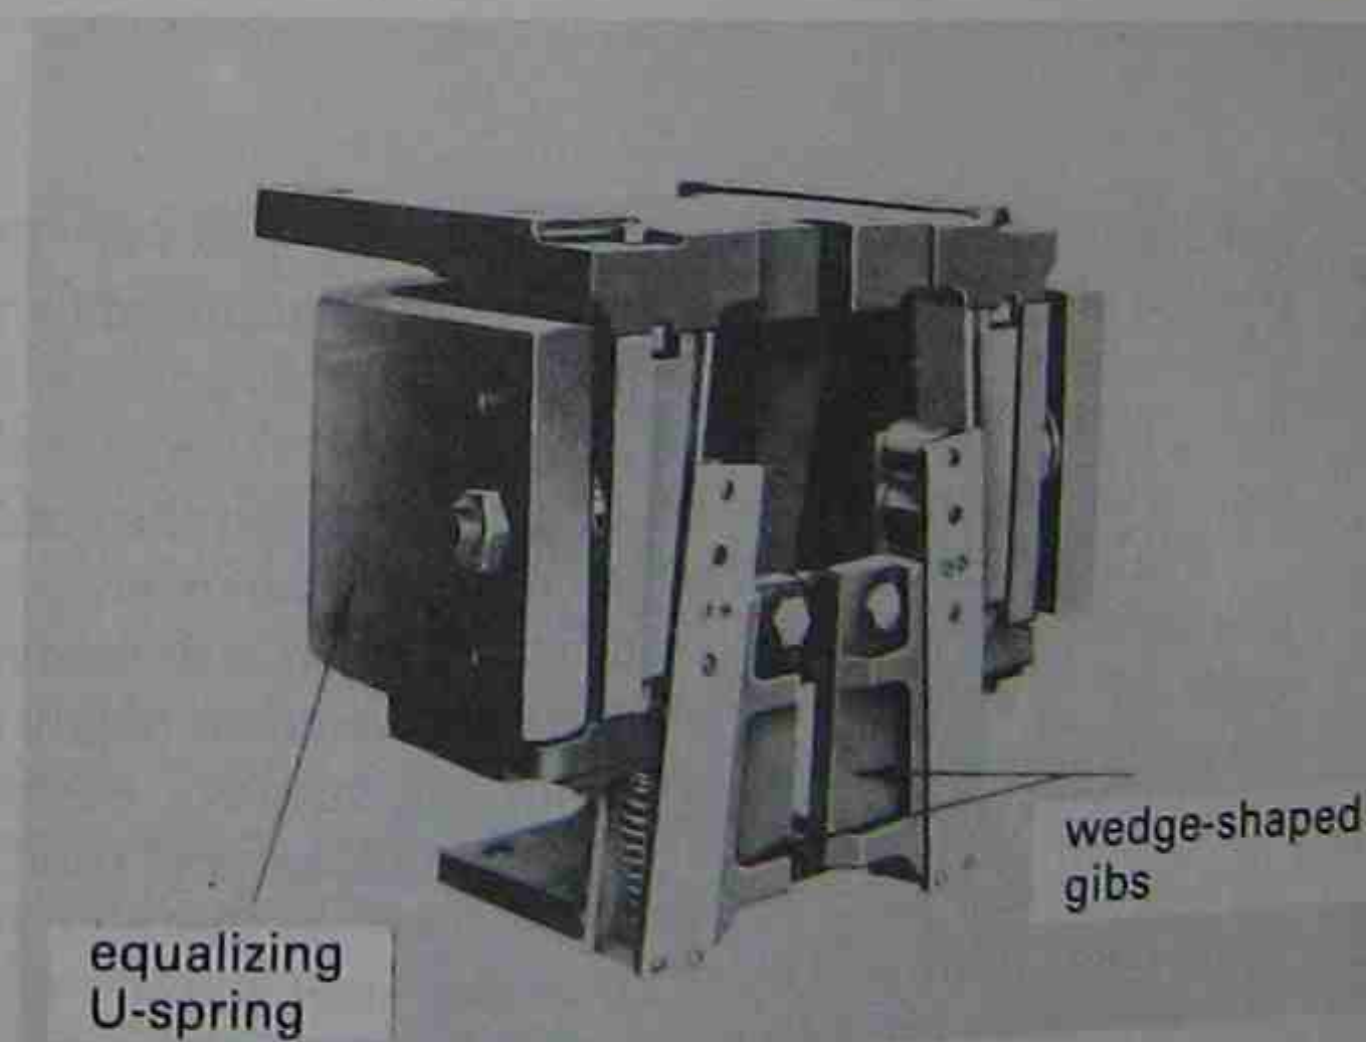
Flexible guide clamp safety gear for light and medium duty elevators (Otis Elevator Co.).
